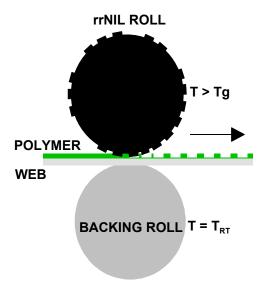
Schematic picture of rrNIL where a Ni-shim is wrapped on the printing roll. The printing cylinder is a tube and an electrical heater can be added inside the cylinder.
